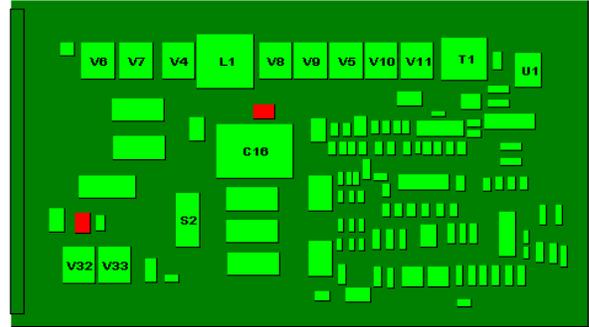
Failure point in the front of the AC-DC's PCB
